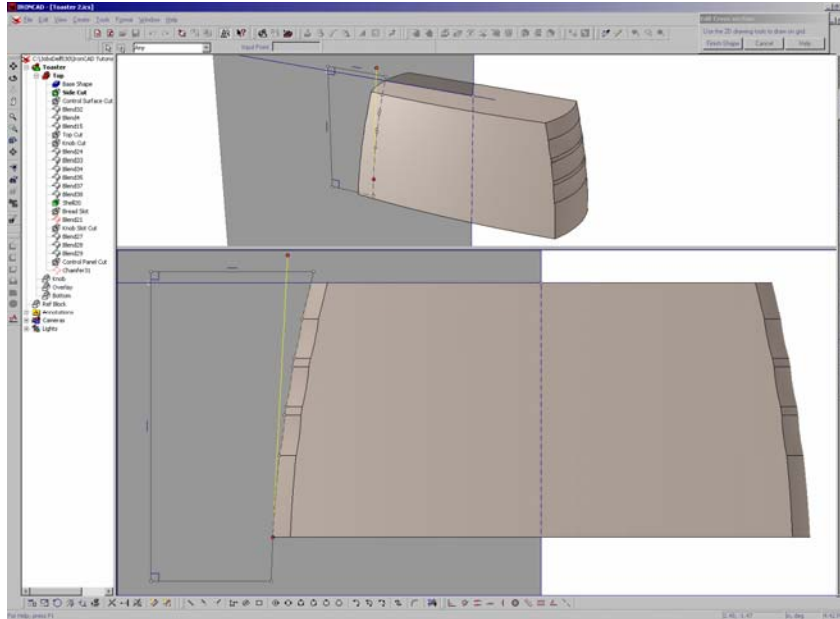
Spin Cut Cross Section shown in Perspective and Front Views
